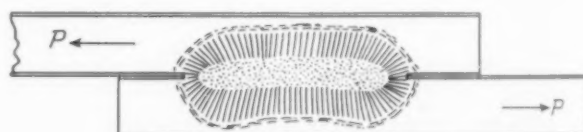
Sketch Showing Ordinary Lap Joint Used to Test Strength of Single Spot-Weld
